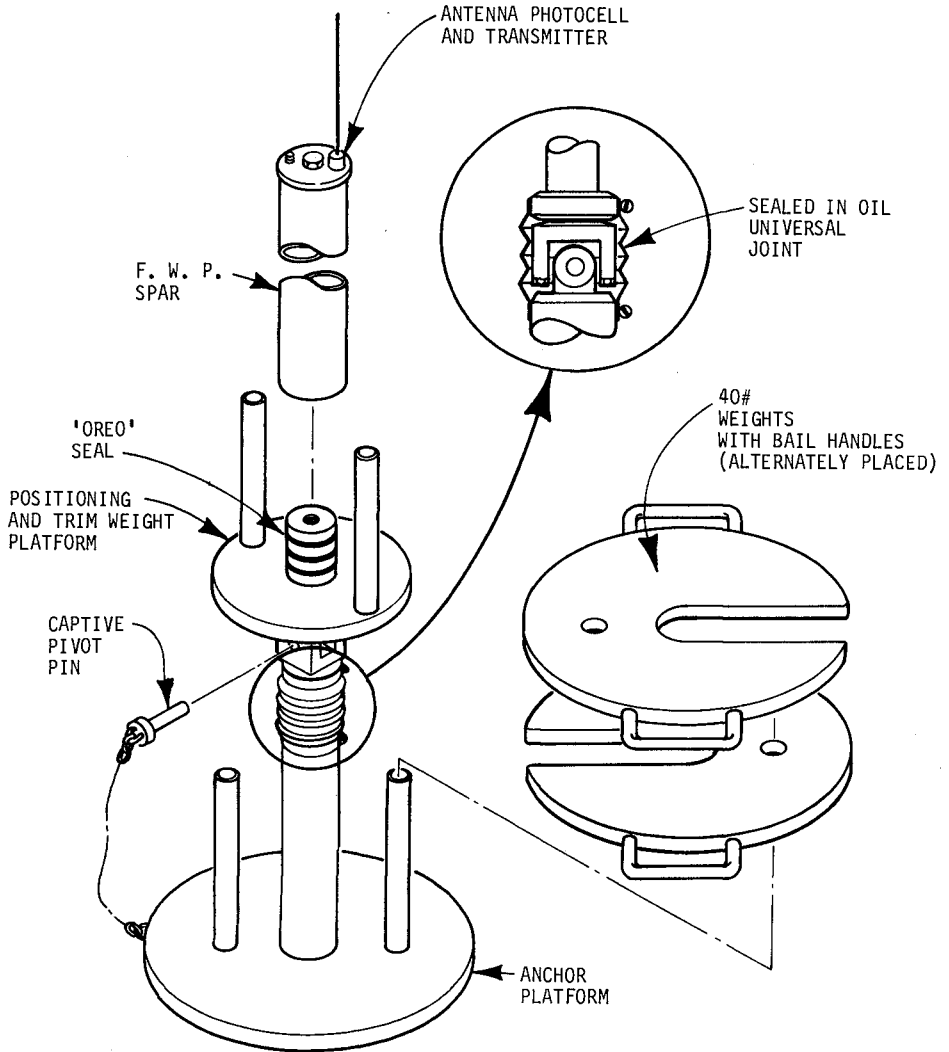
The lower portion of the station separates to facilitate installation and removal of components. Weights added to the trim weight platform enable the buoyant spar to be engaged to the anchor assembly.
